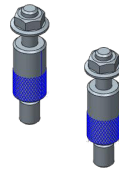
Bolt 3282/45 (1 set = 2 pieces)
